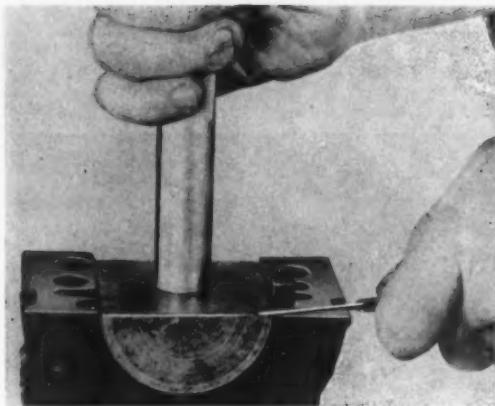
Installing hemp packing oil seal in rear main bearing cap.
